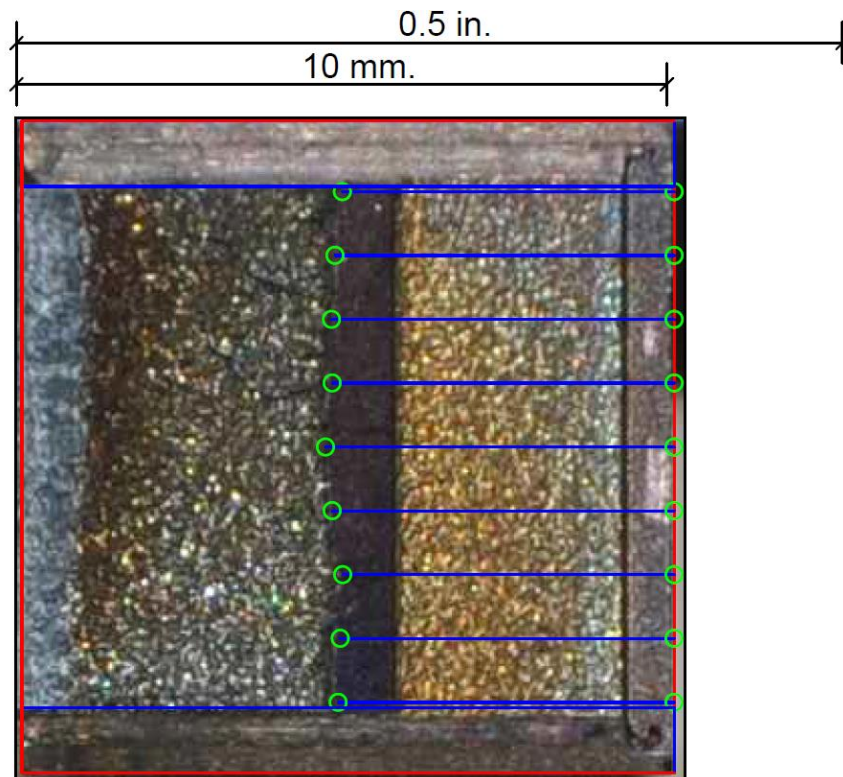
Specimen R8' Fracture Surface
